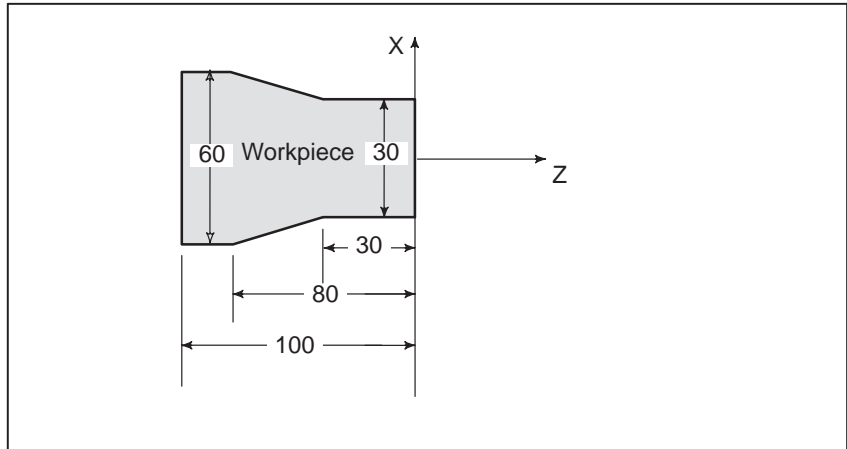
(e) Coordinates and dimensions on part drawing
